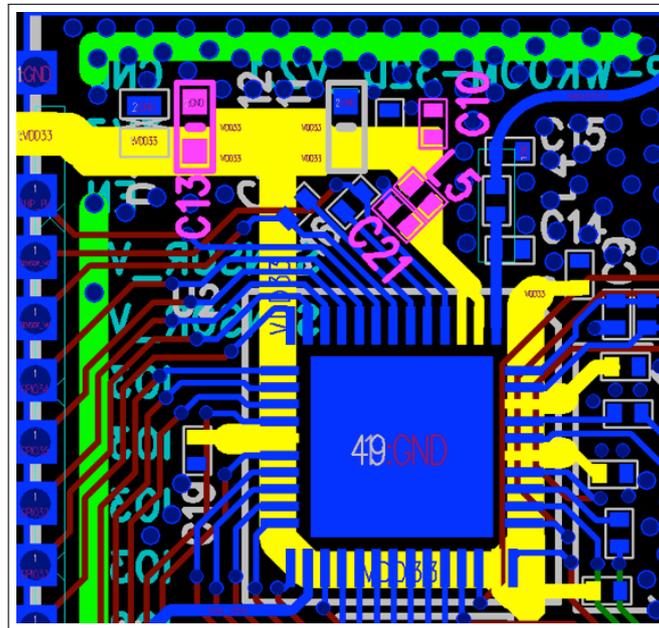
ESP32 Power Traces in a Four-layer PCB Design
